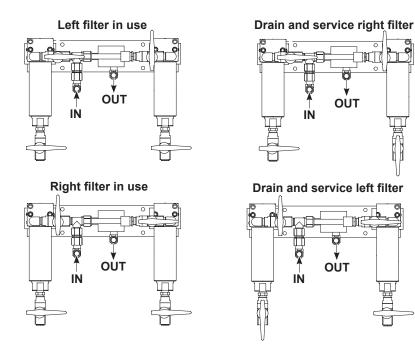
Handle Positions -Inverted Dual Filter Assembly with Three-Way Ball Valve -Standard
